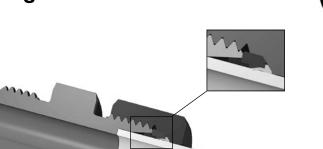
EO-2: The metallic support of the sealing ring acts just like an integrated preassembly tool.
